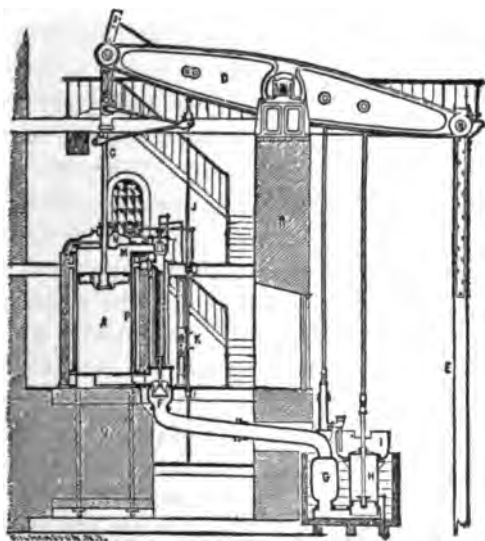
THE CORNISH PUMPING-ENGINE, 1877.
